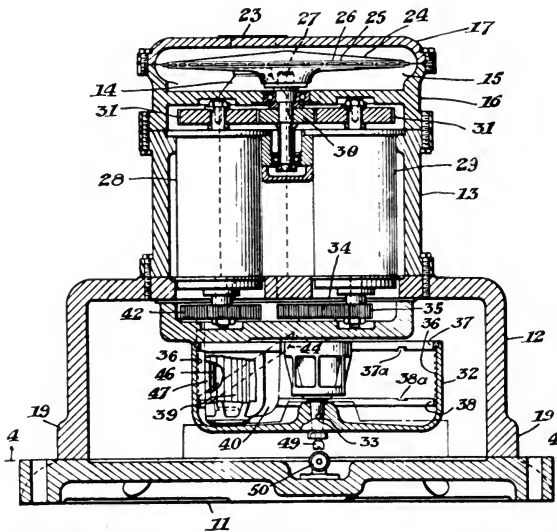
A cross-sectioned view showing the engineering details of the camera.
